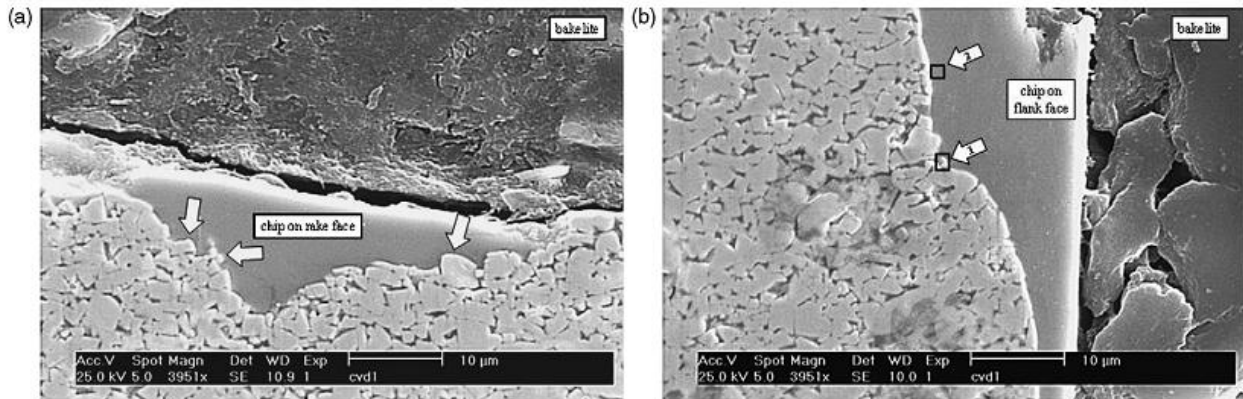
Attrition at the a) rake face and b) flank face [19].
